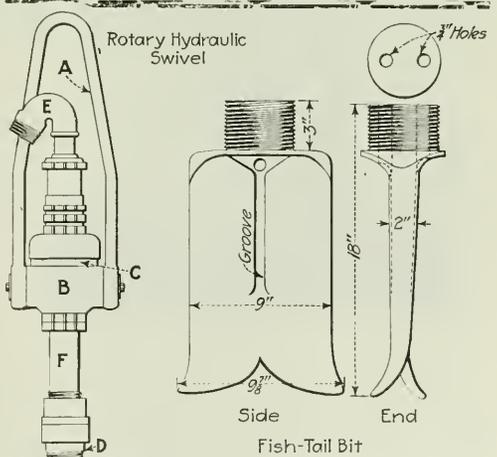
HYDRAULIC SWIVEL USED IN ROTARY METHOD
